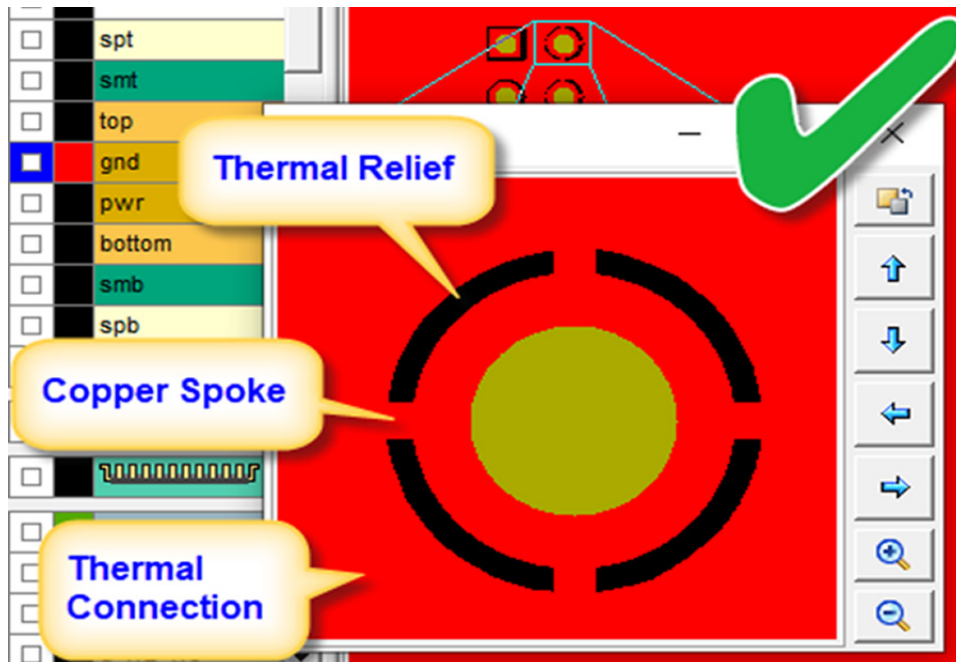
A thermal connection reduces the heat dissipation rate in plane layers during wave soldering, permitting solder to flow completely through the barrel. 🛠️
